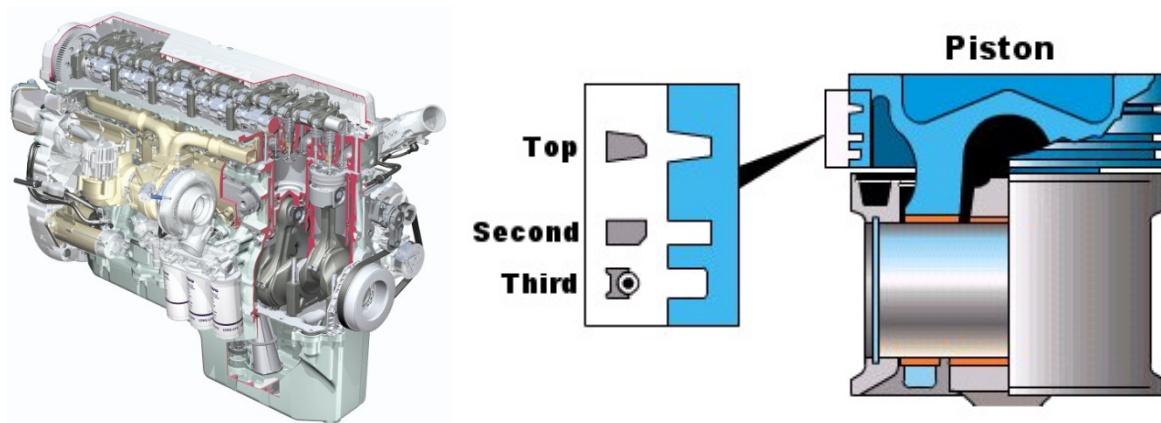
Left: Volvo D13 diesel engine. Right: Overview of the piston and piston ring design.
